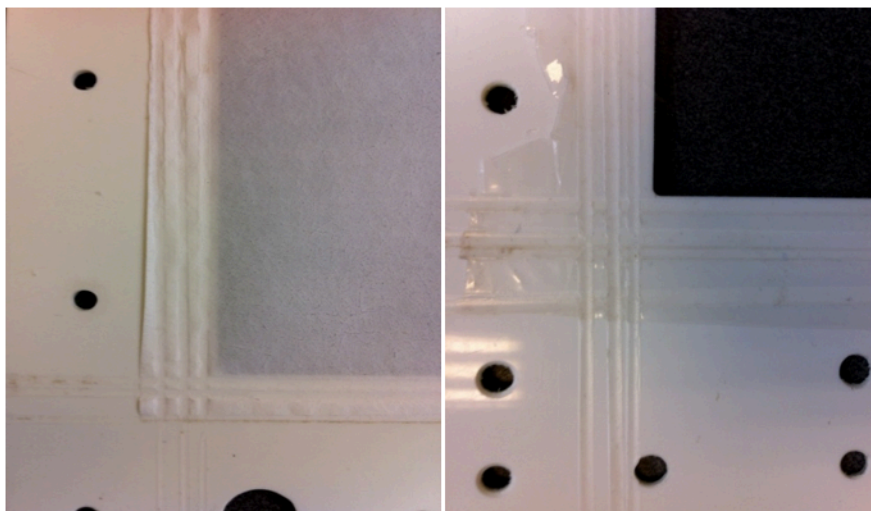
Thermal welding of a) the membrane and b) the condensing plate, to polypropylene frames
